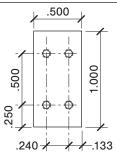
Frame stretcher — make from brass or steel, 1/4-inch hex.
